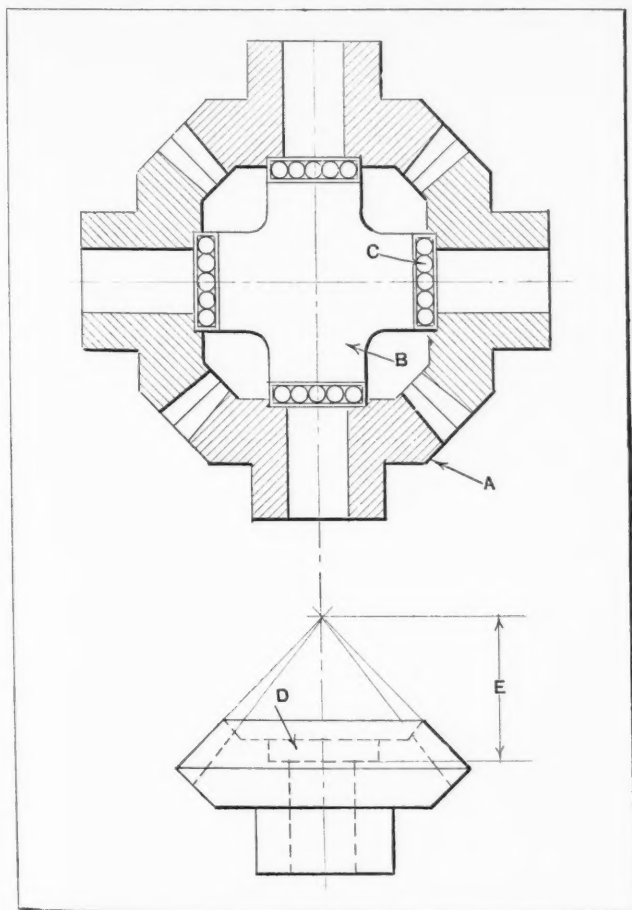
Precision Miter Gear Assembly Used in Talking-moving Picture Synchronizing Mechanism
